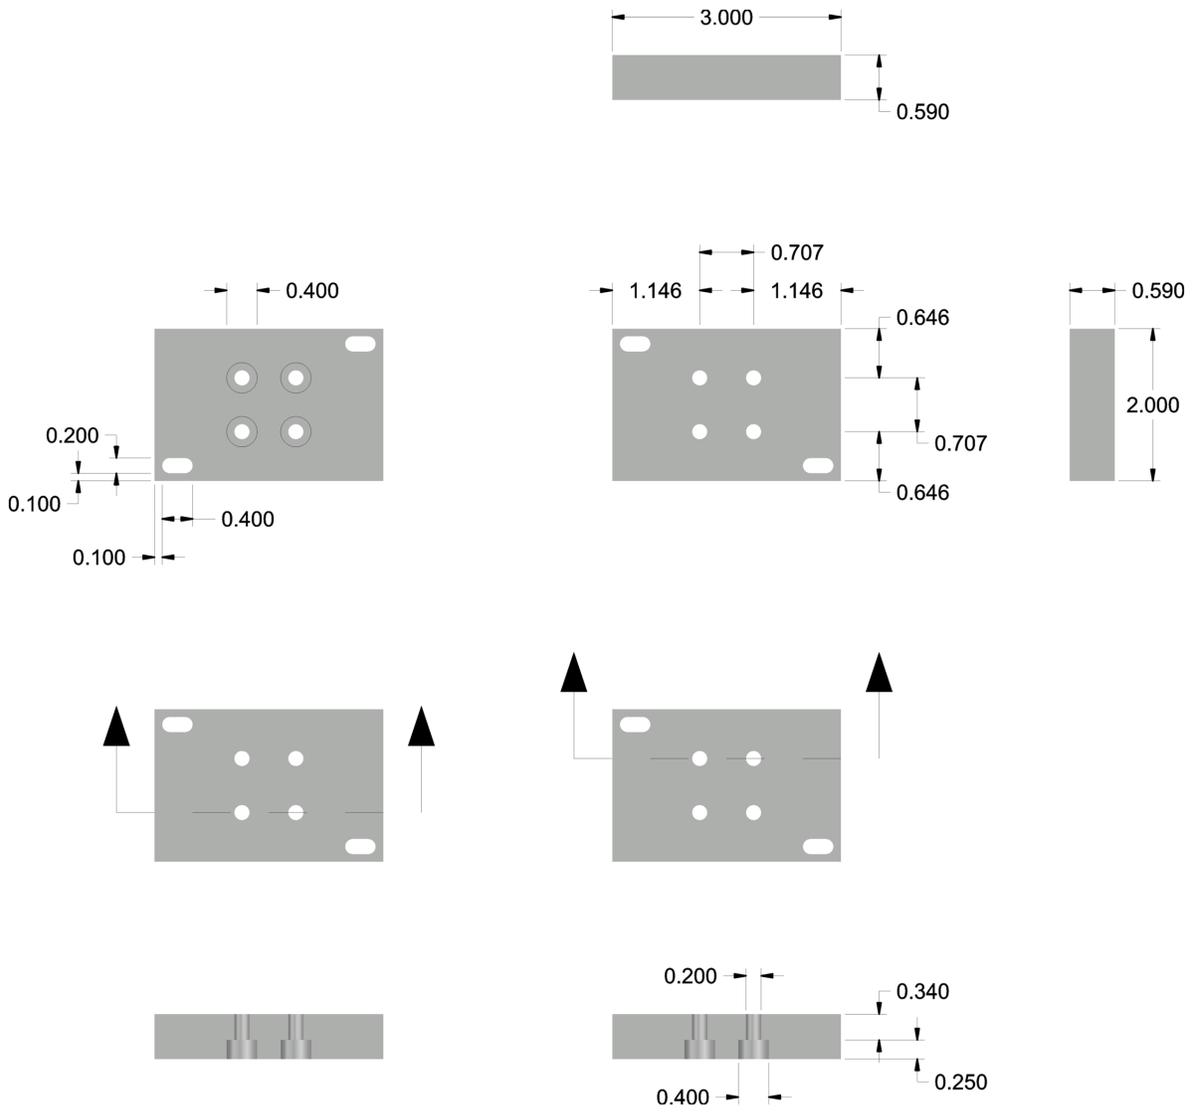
Orthographic drawings of mounting blocks for three-way pneumatic valves with bases parallel to panels
